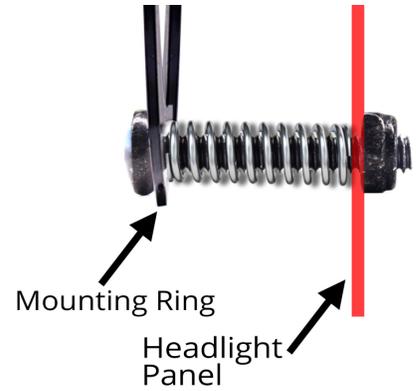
Snug the locknut onto the screw on the back side of the headlight panel. Repeat the process for the other two mounting holes.
